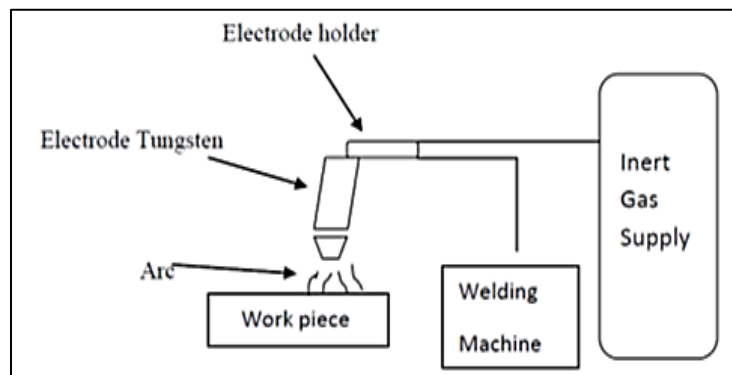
Manual Gas Tungsten Arc Welding
